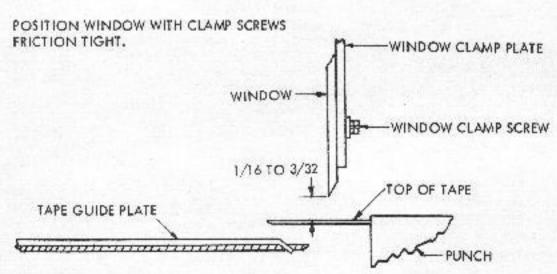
SEND-RECEIVE TYPING REPERFORATOR SET COVER
